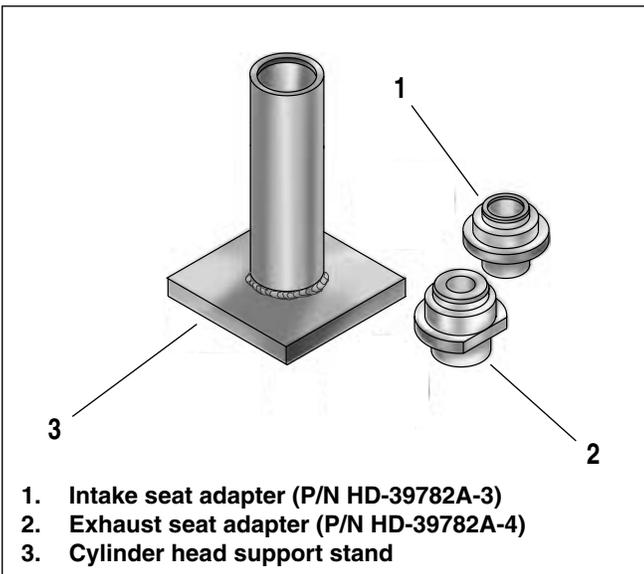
Cylinder Head Support Stand (Part No. HD-39782A)
